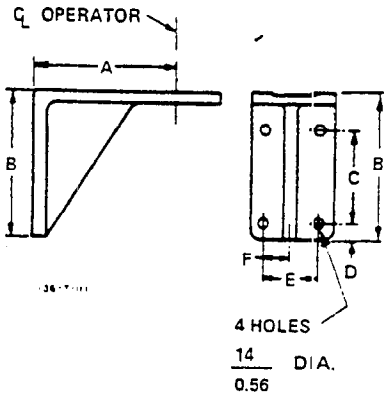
Wall Bracket Dimensions (See Table 8)
